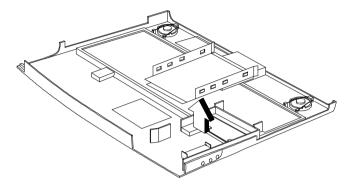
Removing the Hard Disk Drive Heat Sink
